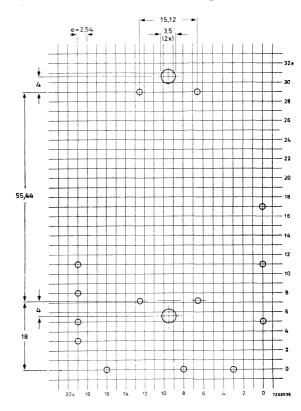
Hole pattern for mounting on a p.w. board (component side), hole dia 1.3 ± 0.1 mm
